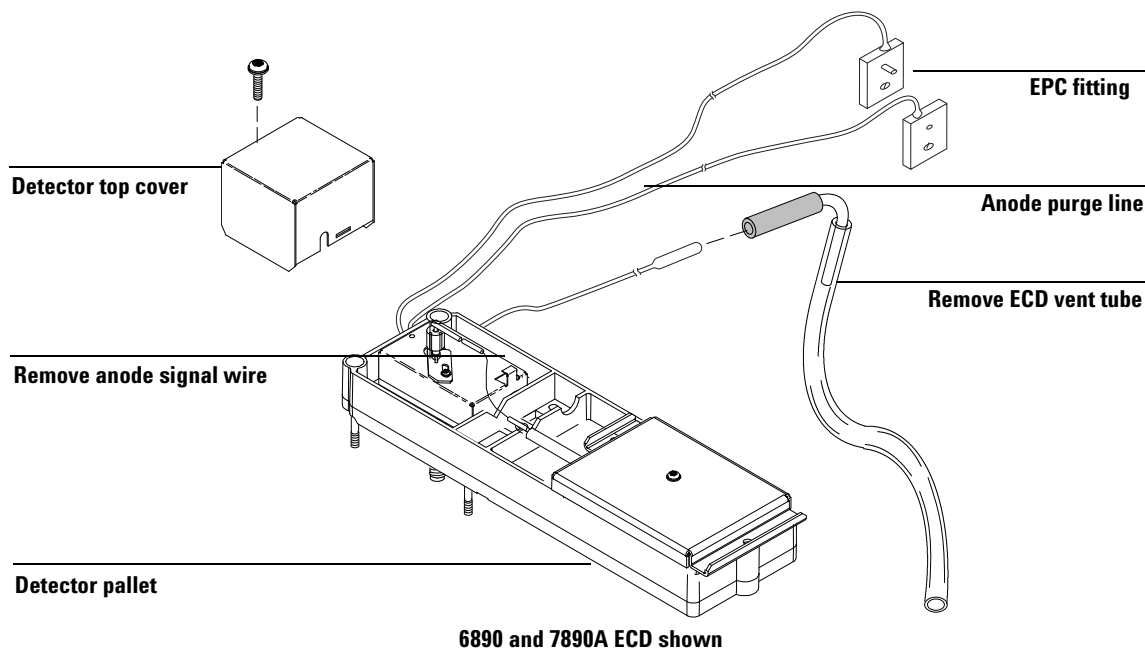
Disconnect the cables (6890 GC shown, 7890A and 7820A GCs similar)
